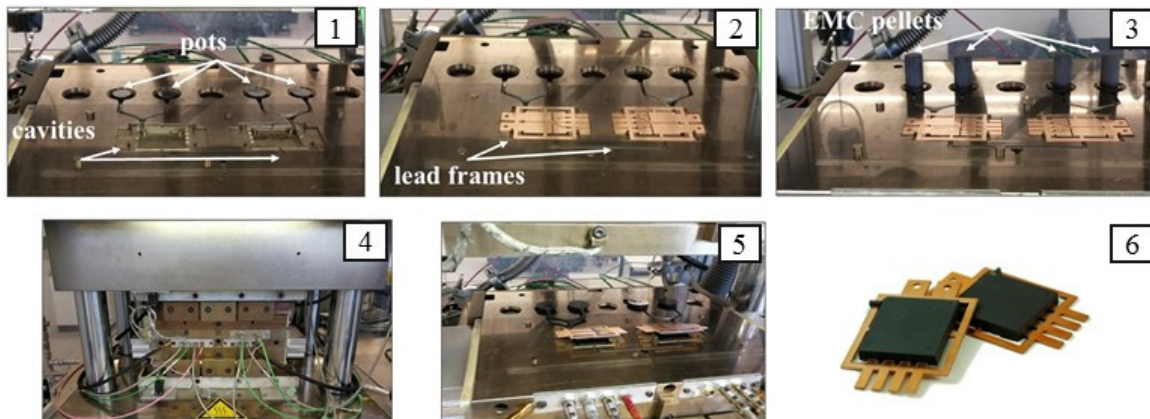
Process steps of the transfer molding for encapsulation of the semiconductor packages, mold tool with cavities and pots (1), lead frames are placed in the cavities of heated mold (2), EMC pellets are brought to the pots (3), tool is closed for injection of EMC and in-mold cure (4), ejection of the encapsulated lead frames after cycle time is over (5), encapsulated electronic packages after the molding process (6)
